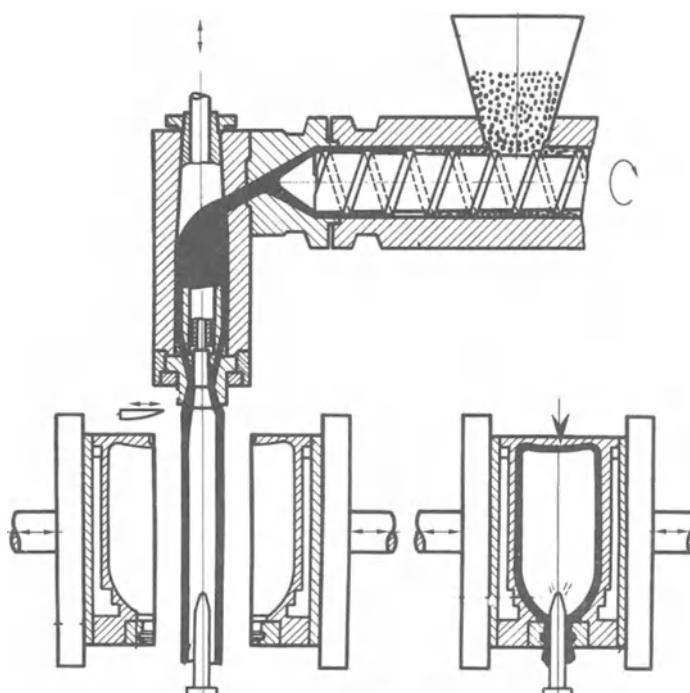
Schematic of a blow molder using an accumulator head.
